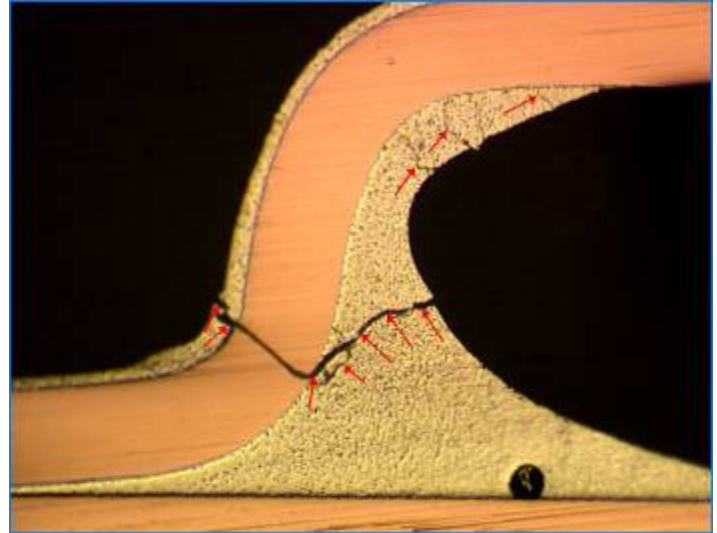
cross section, SN63, U20, left lead and solder crack and void, 100x
